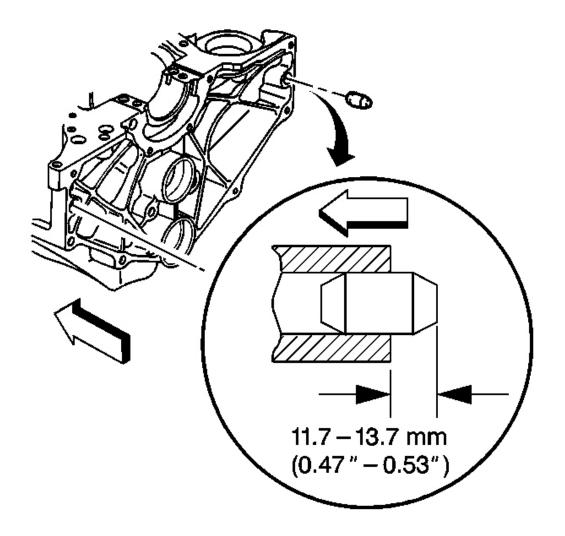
Installing Transmission Locator Dowel Straight Pins Courtesy of GENERAL MOTORS CORP.
